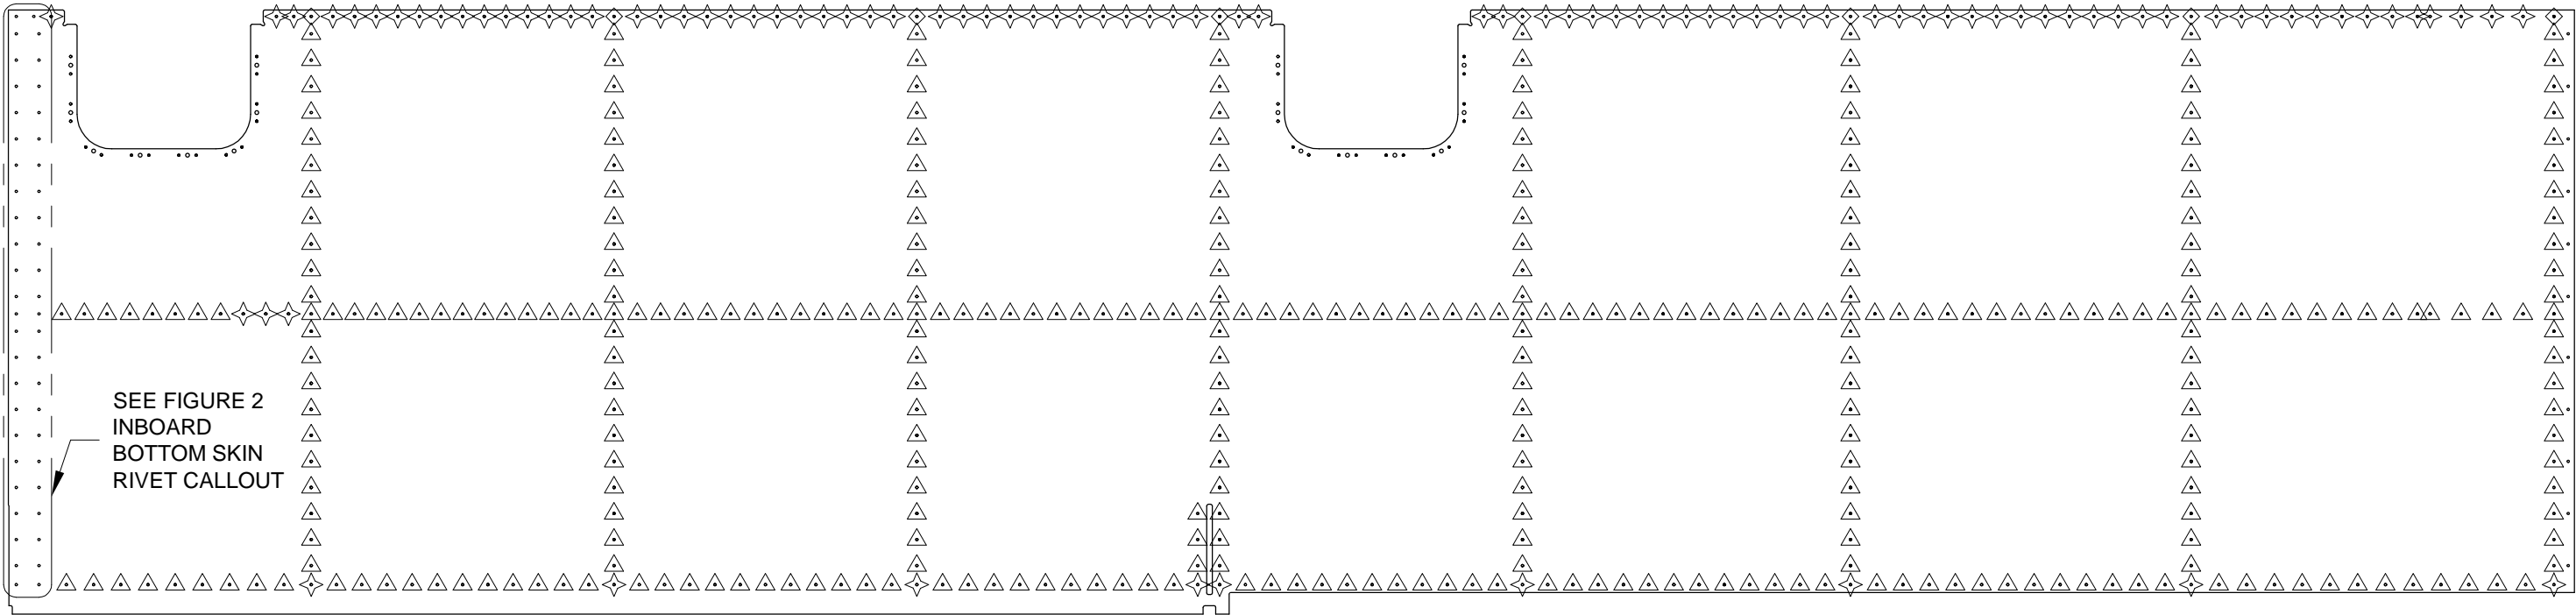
OUTBOARD BOTTOM SKIN RIVET CALLOUTS
